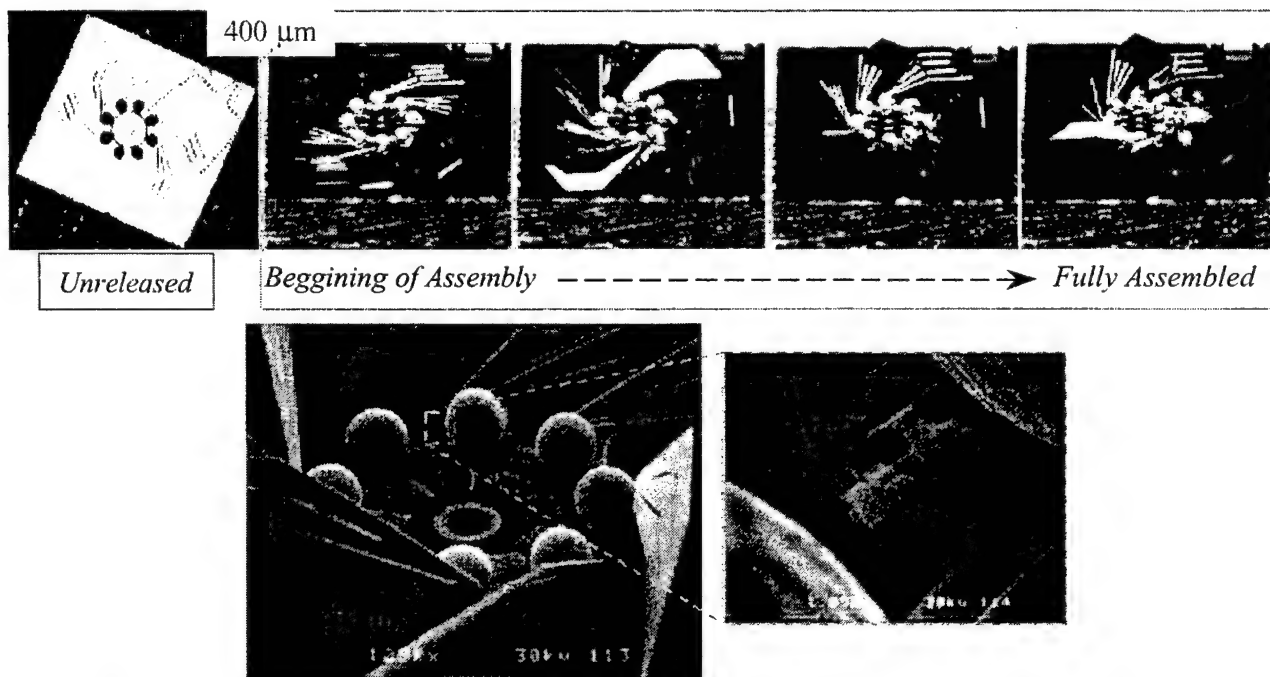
The top shows captured video images of an unreleased micro axial flow fan and the assembly sequence, after release, while solder is assembling the fan blades during heating on a hot plate. The bottom is a SEM showing the SDA rotary motor and solder joints with an exploded view of the fan blade hinges.
